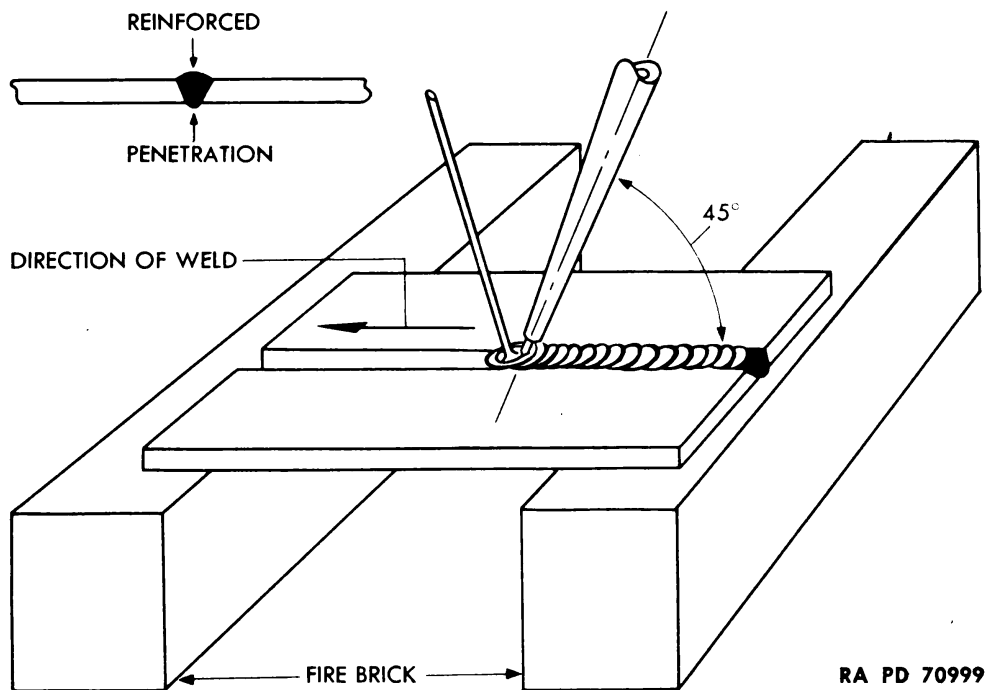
Position of Rod and Torch in Making a Butt Joint in the Flat Position
